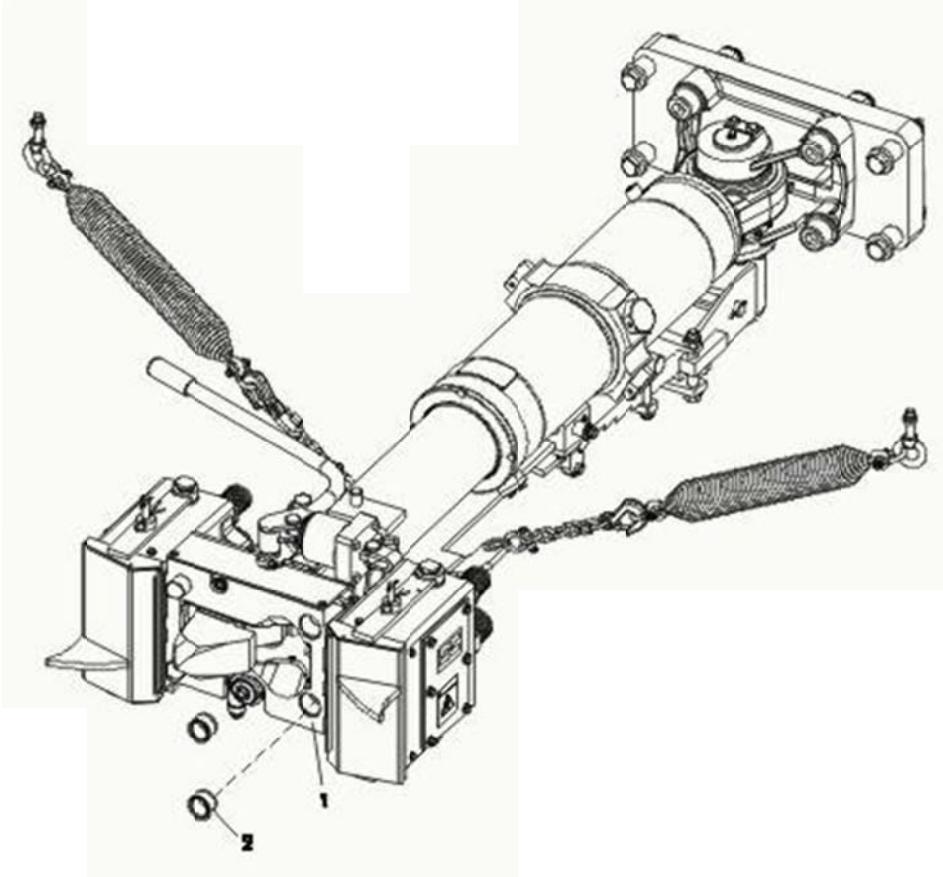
COUPLER HEAD GUIDE BUSHING REPLACEMENT
